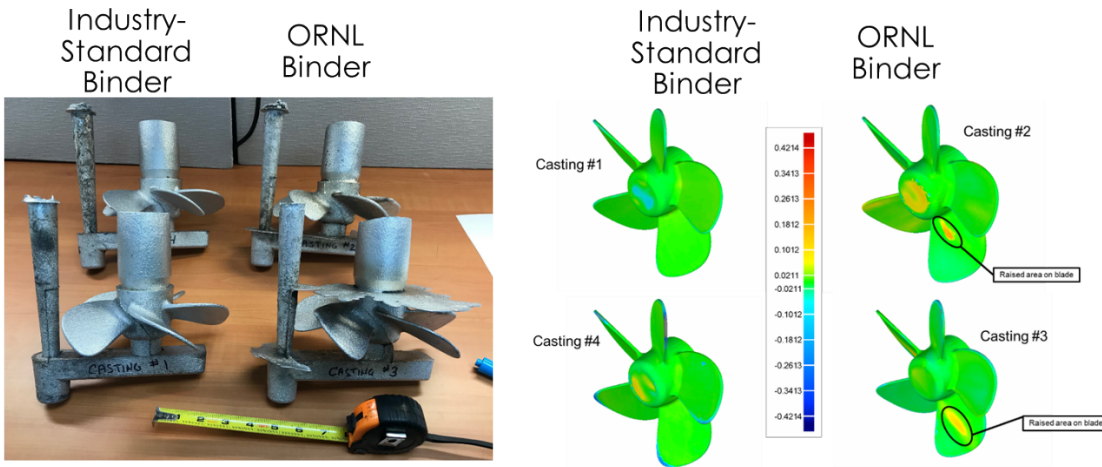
Castings made with printed molds (left) surface measurements of castings (right)
